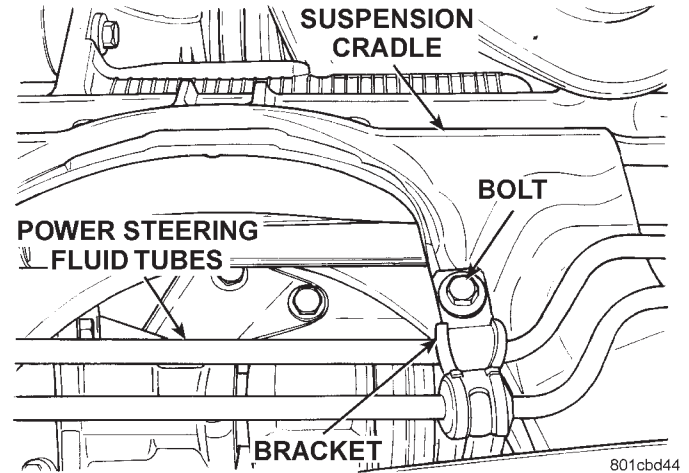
Power Steering Hose Attachment To Suspension Cradle
